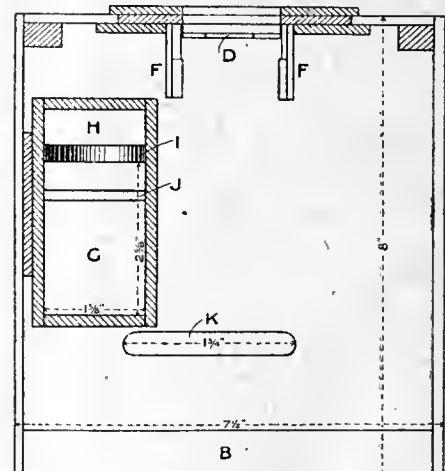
Plan. B, back of attachment with U-shaped portion cut away in centre. D, focussing screen and plate holder. F, metal plates holding focussing screen when folded back. G, magazine for plates. H, space for finger when removing plates. I, division with U section cut out. J, small strip of wood, to keep plates off bottom of magazine. K, opening to tank.
